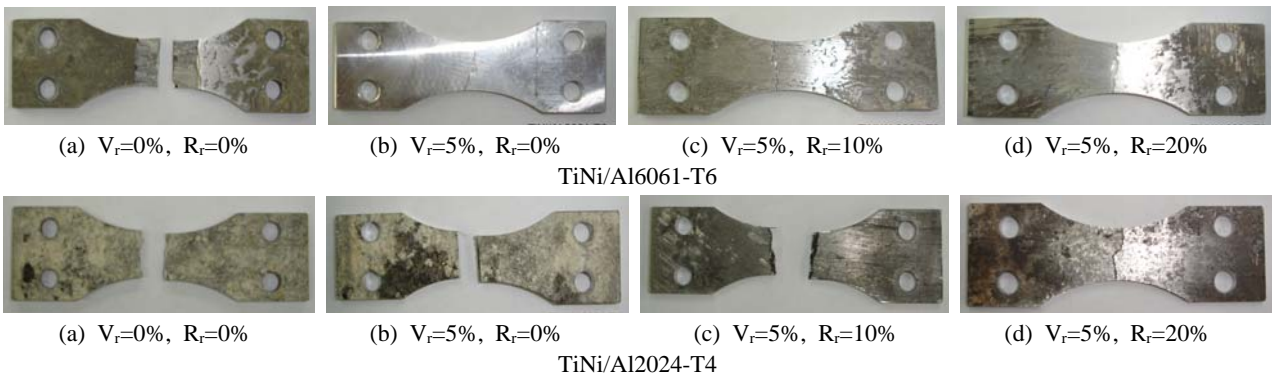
Fatigue fractured specimen of TiNi/Al shape memory alloy composite
